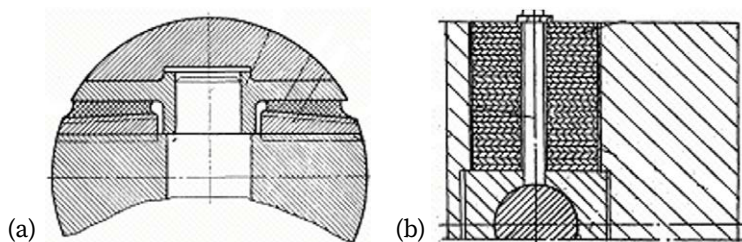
Designs of damping elements: (a) polymer insert; (b) package of steel plates
